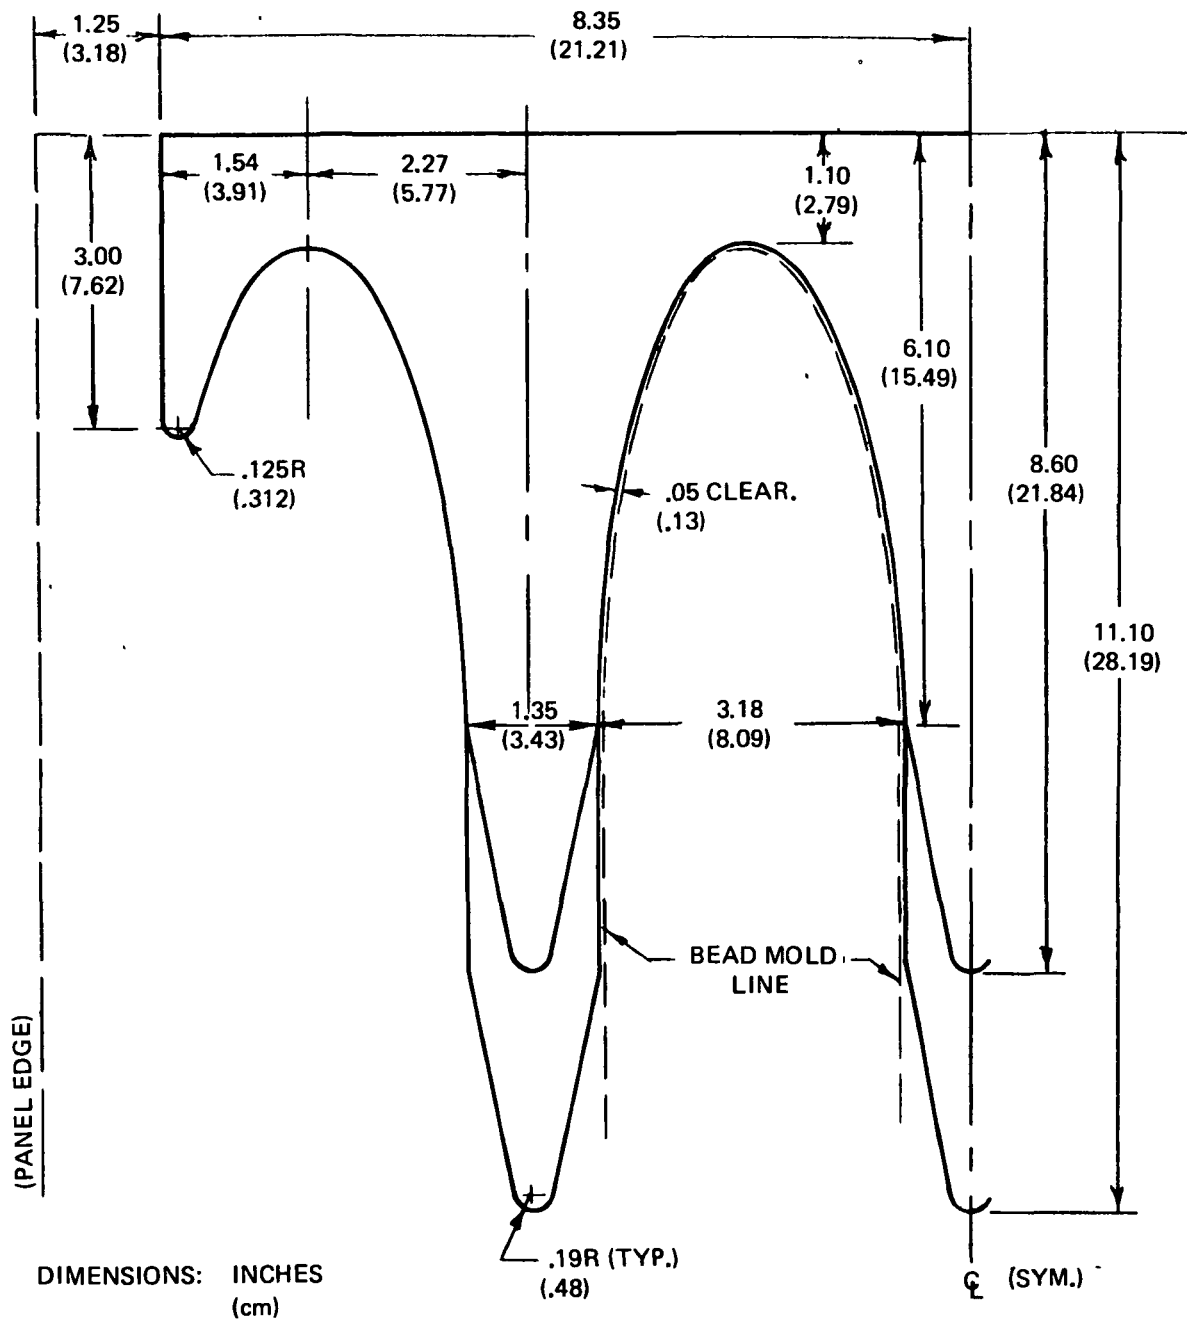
PANEL LOWER SURFACE DOUBLER DETAILS--CONFIGURATION TYPE 2
